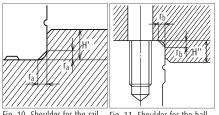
Shoulder for the rail Fig. 11 Shoulder for the ball datum surface slide datum surface
